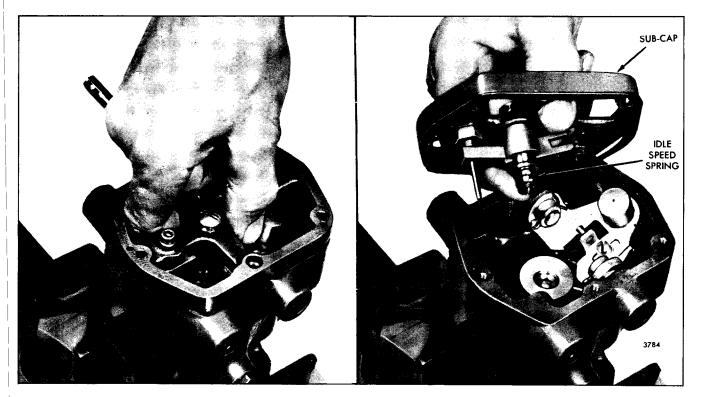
Removing or Installing Governor Sub-Cap Assembly
